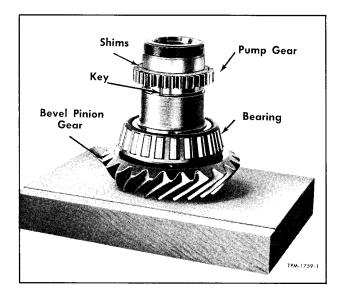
Installing Fluid Pump Drive Gear and Bearing Adjusting Shims
